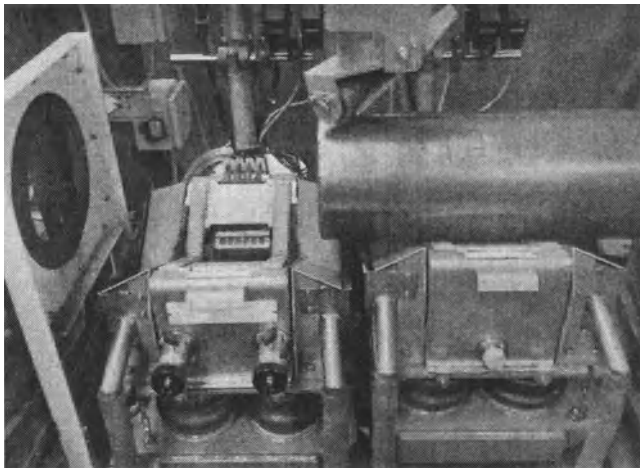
Tube-testing installation (type GRP, design Krautkrämer) for tubes of more than 100 mm in diameter with two testing tanks. The right hand one has already been lifted and pressed against the incoming tube. The exposed left-hand tank shows the linear probe assembly. The coupling water which is introduced after contact with the tube, fills only the small space adjacent the probes
